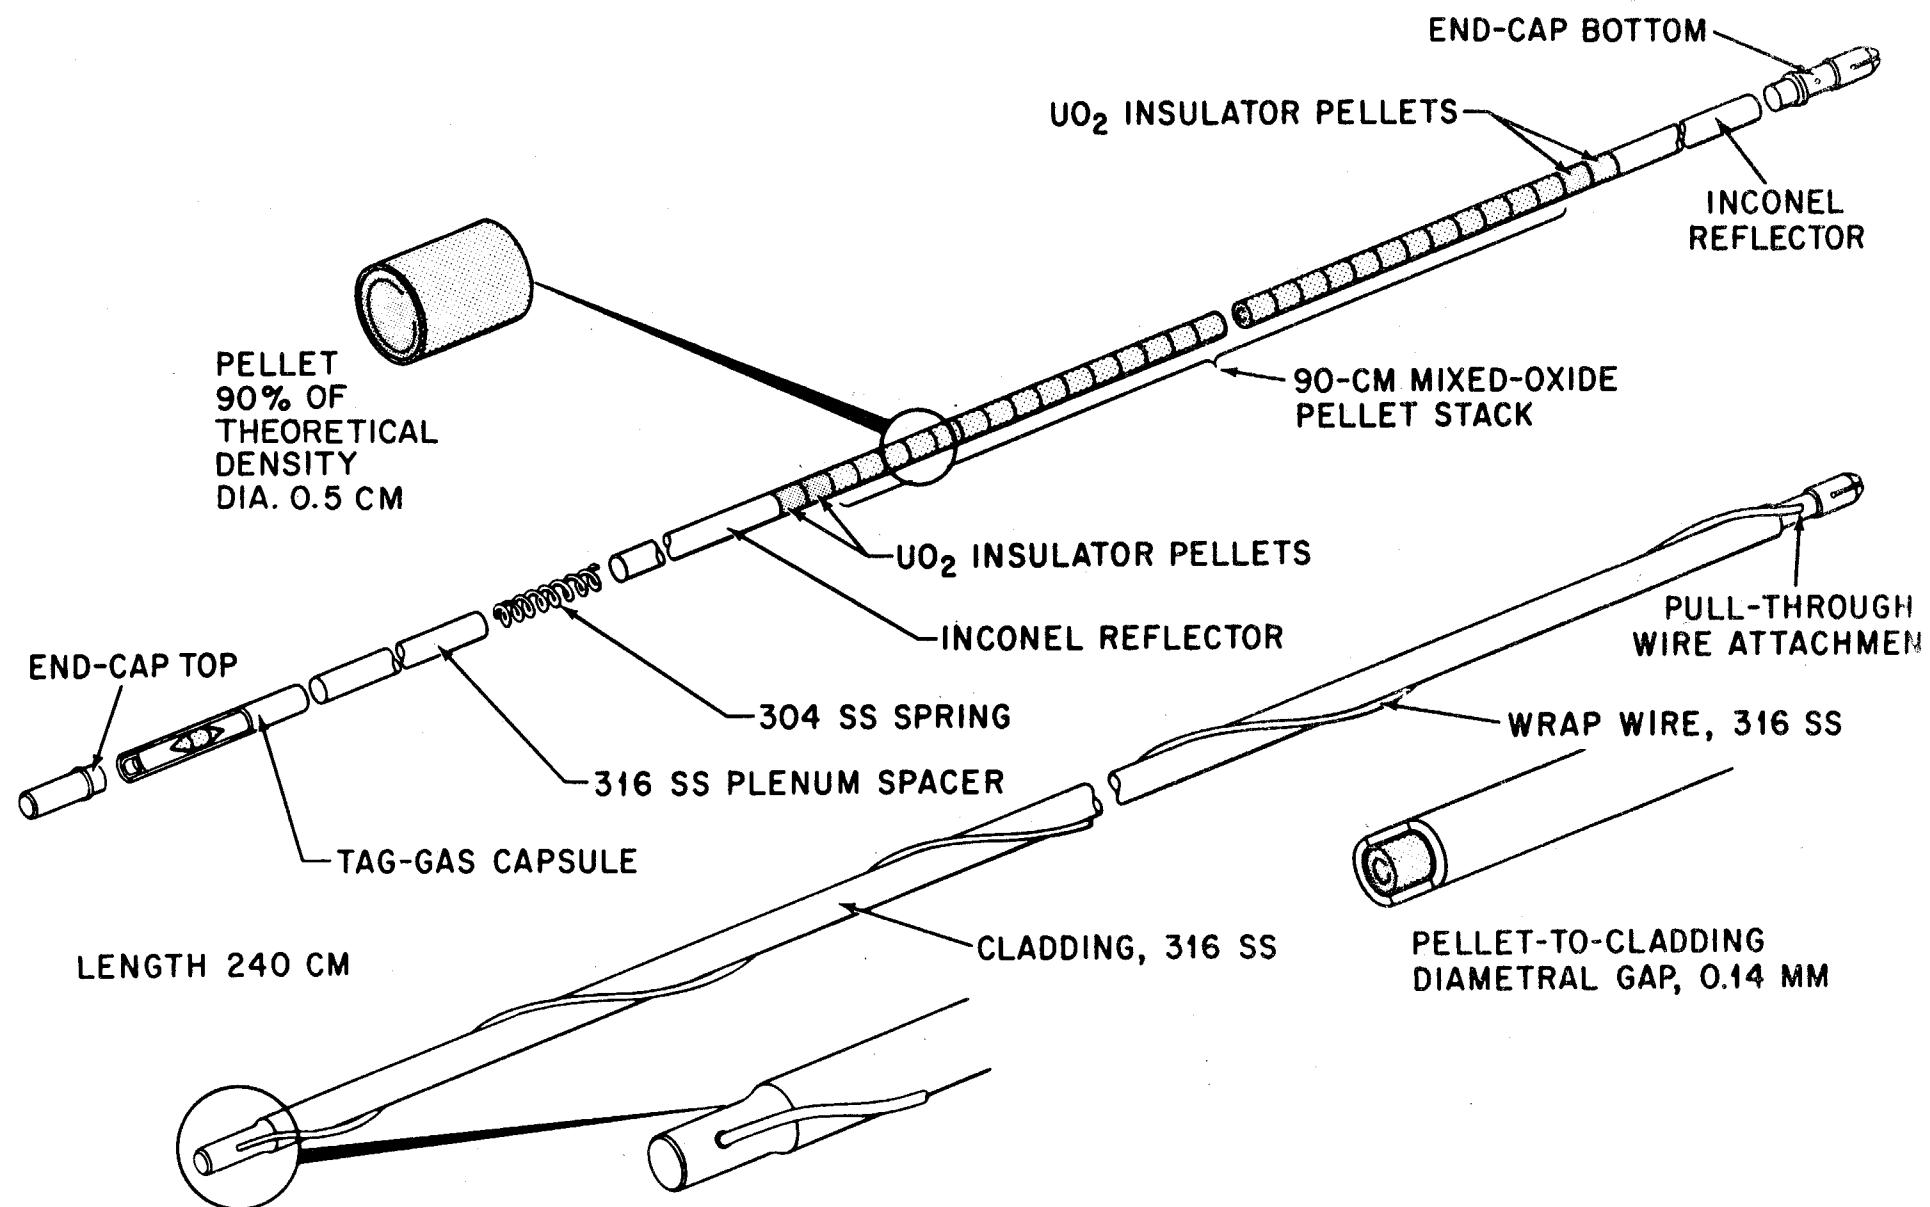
Fuel pin of the Fast Test Reactor. (Courtesy C. Burgess, Hanford Engineering Development Laboratory.)
